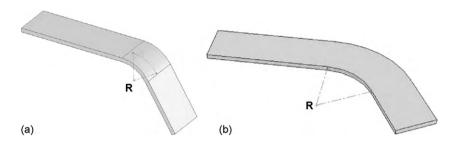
Schematic diagram of bending modes: (a) out-of-plane bending; (b) in-plane bending.
